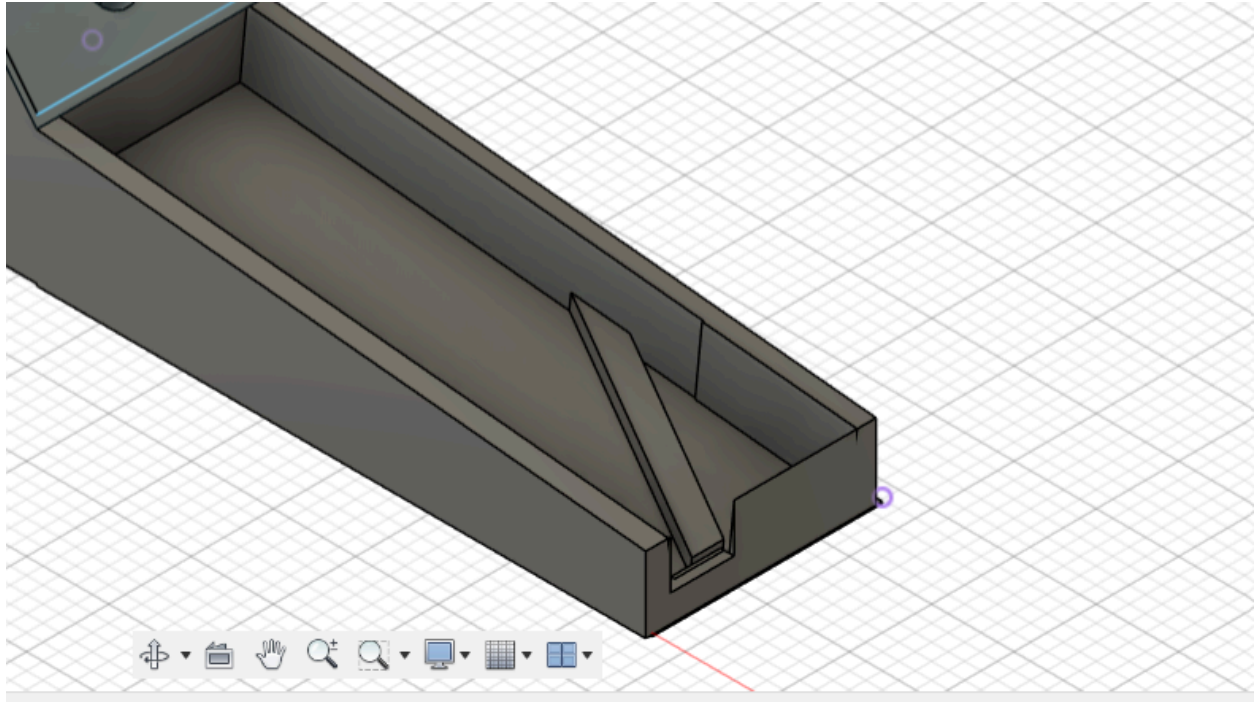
Electronic Skee Ball Machine Internal Ball Return
